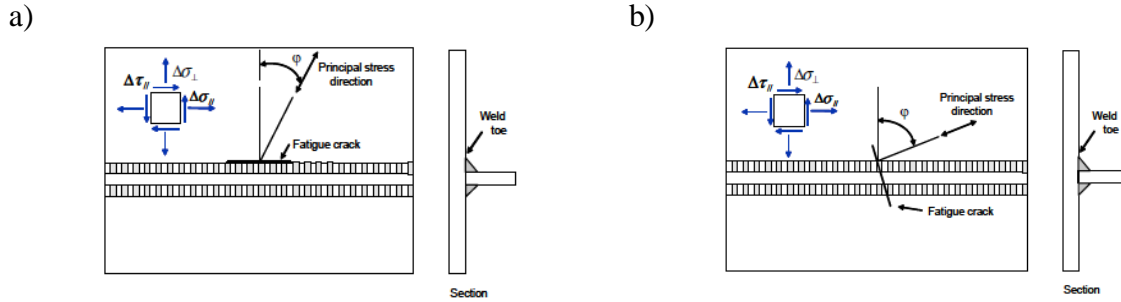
Local stresses at welded structure with a) fatigue crack along weld toe for a principal stress normal to the weld and b) when principal stress direction is more parallel to weld toe (DNV, 2012)
